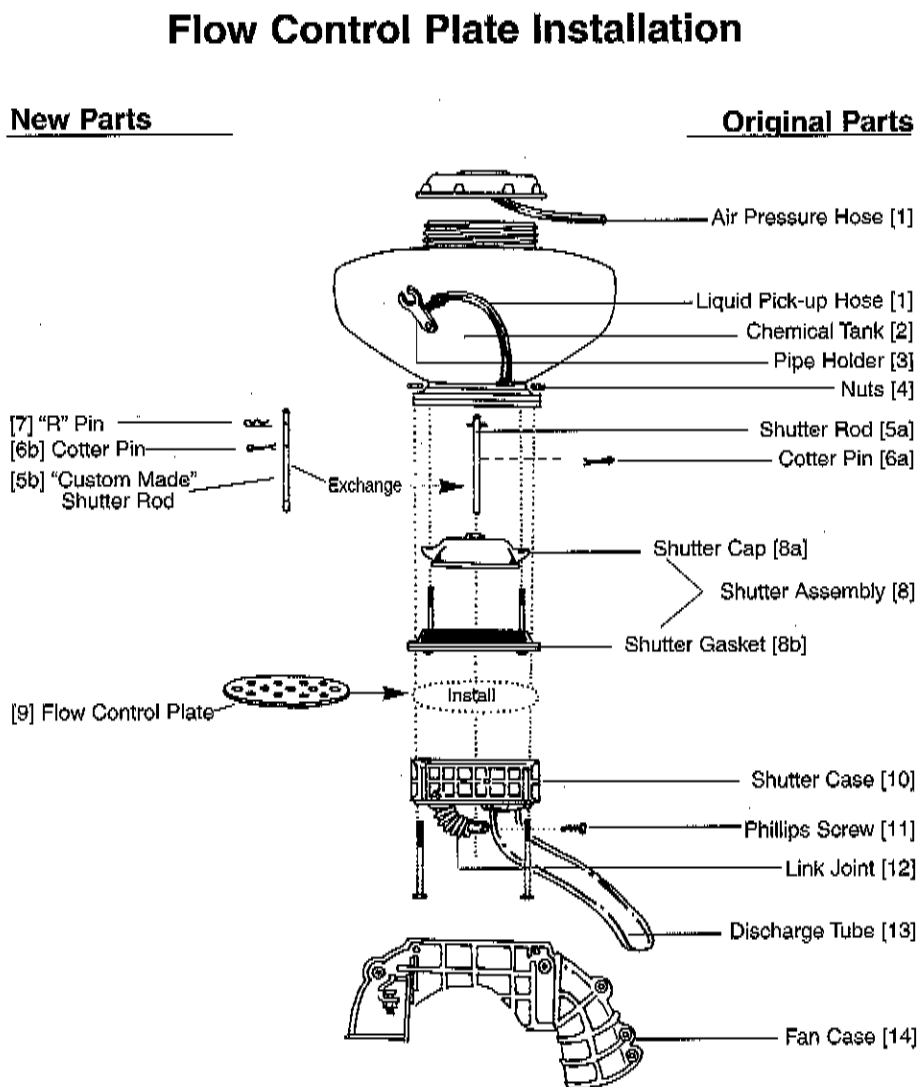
Exploded diagram identifying parts and showing locations before and after modification.
